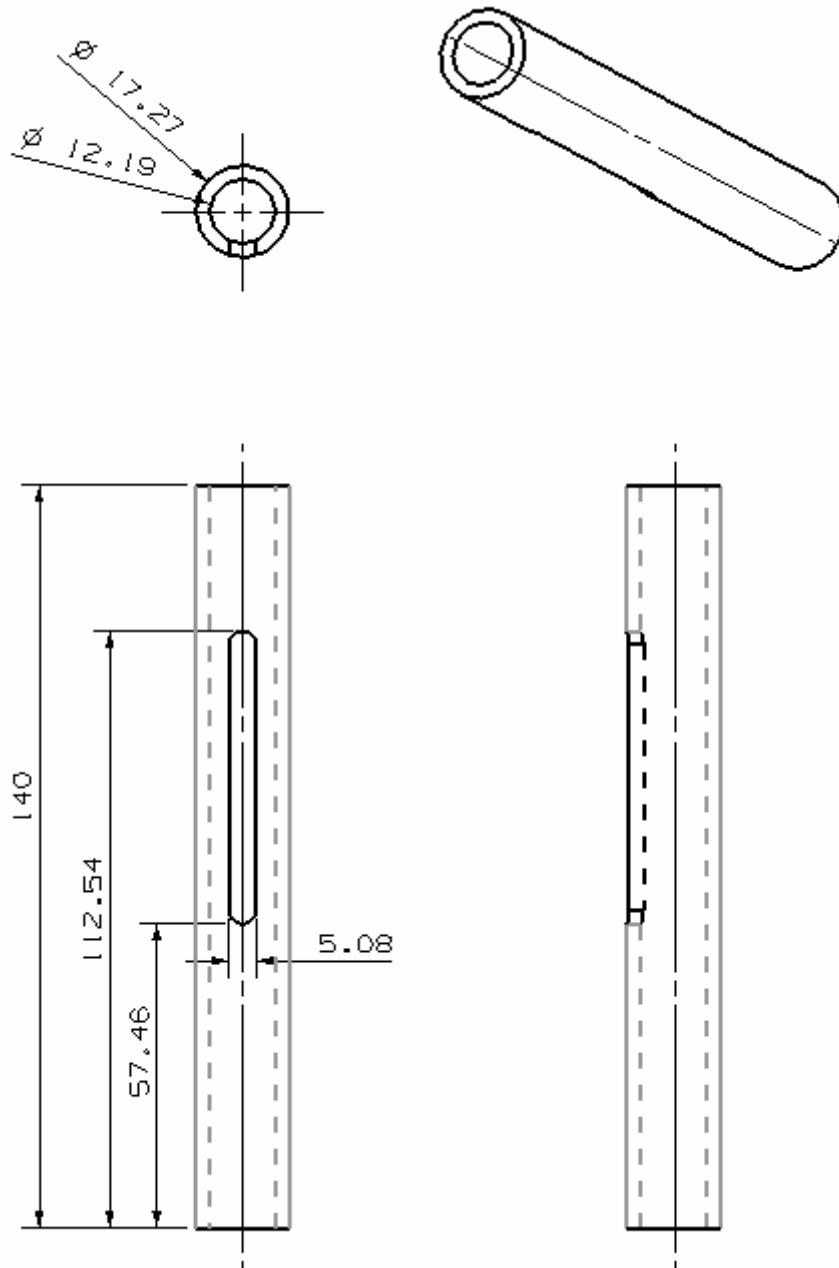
Figure L: Manufactured Cylindrical Jig Used in the Bending of the Stainless Steel Cooling Channel
